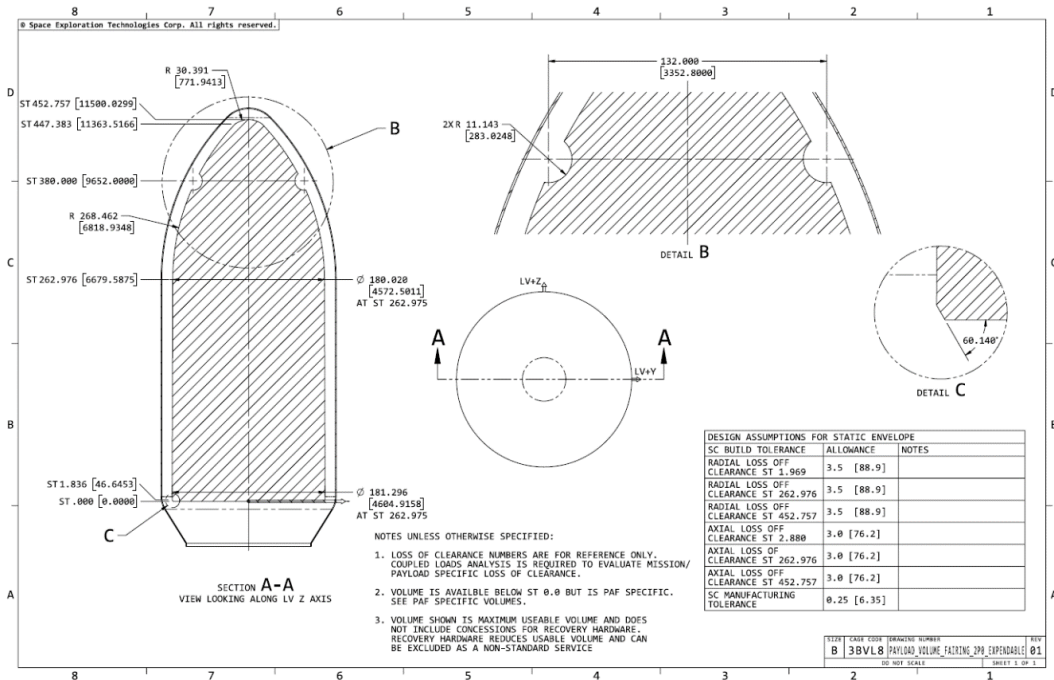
Falcon 9 fairing dimensions, inches (millimeters) [4]
